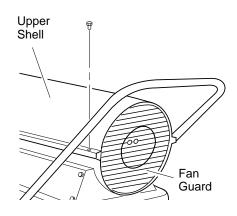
Upper Shell Removal, 29,3 kW (100,000 Btu/Hr) Model
